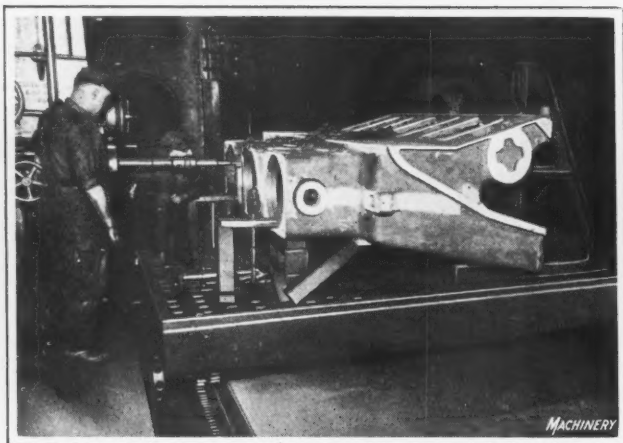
Drilling Bolt Holes in Top of Engine Frame
